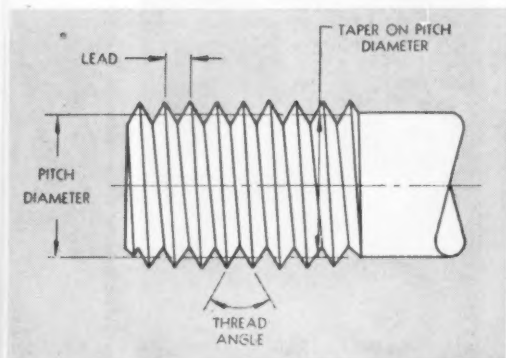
Drawing showing elements that are controlled by pitch diameter tolerances.
